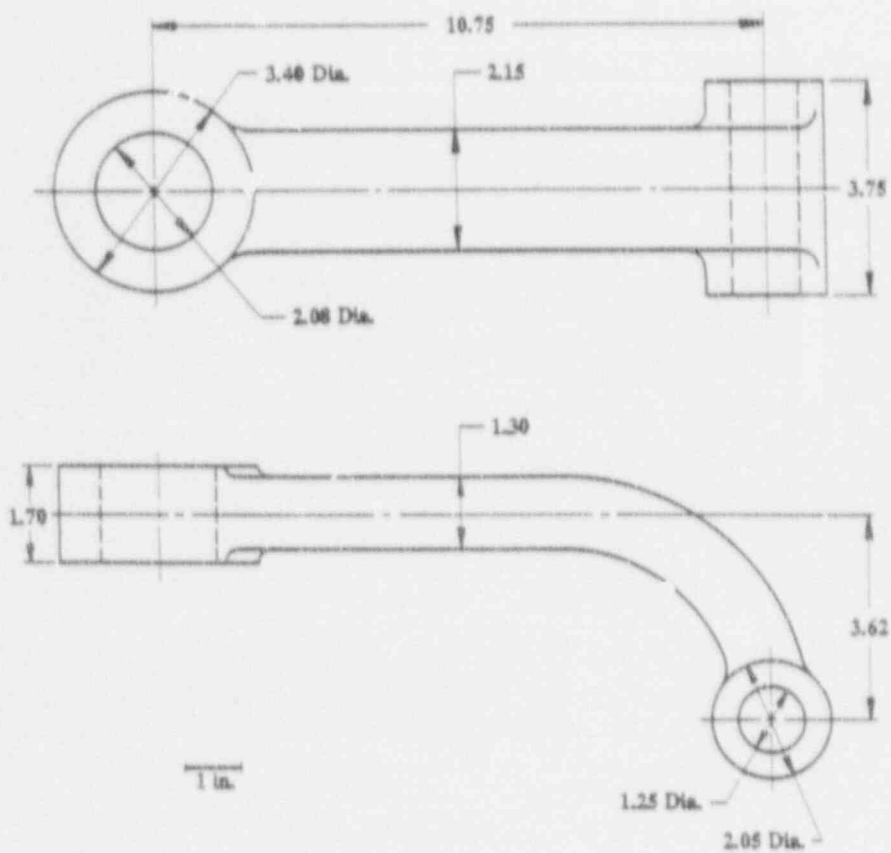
SAMPLE NO. 240, 16-INCH CHECK VALVE. Dimensions in inches. Diagram is schematic.
